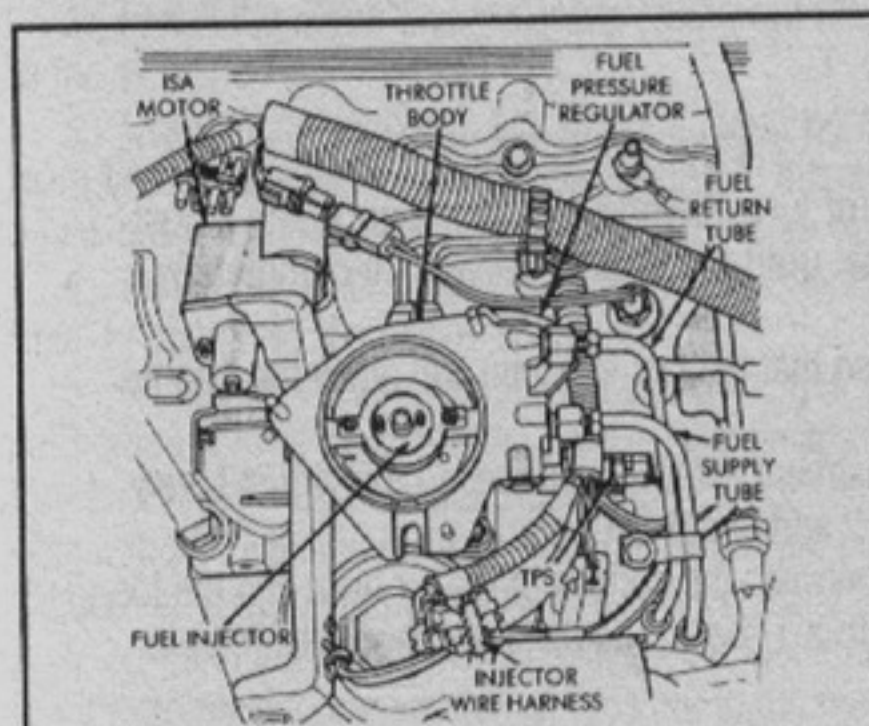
Throttle body assembly—1987-90 with 2.5L engine
